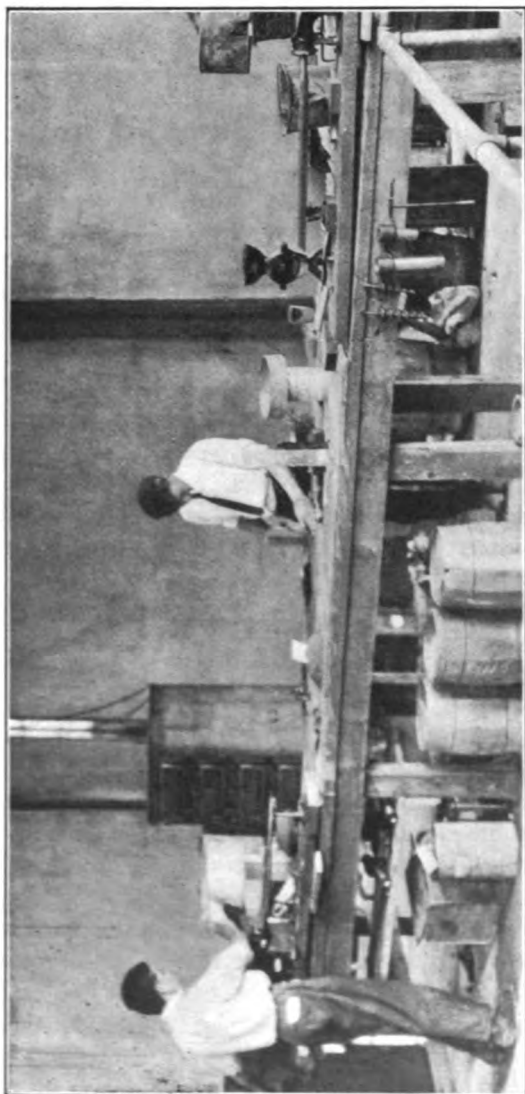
CORE-MAKING BENCH IN TESTING LABORATORY
